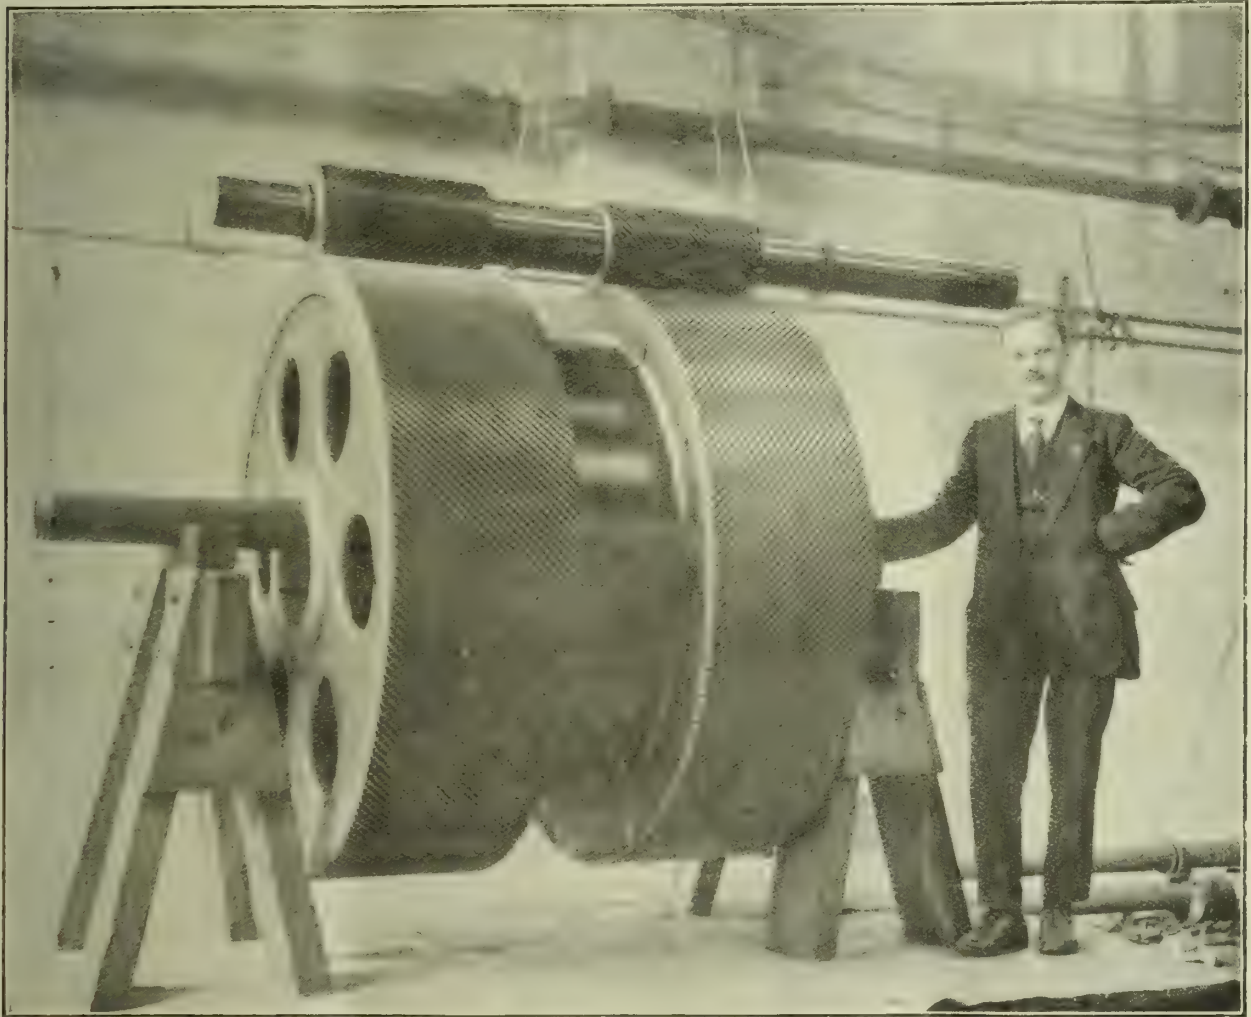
A TURBINE GEAR WHEEL AND PINION.
